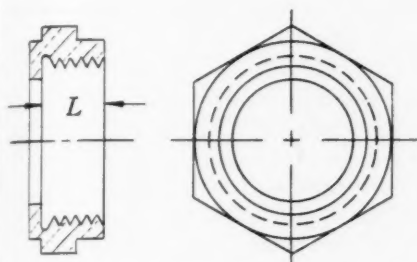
Coupling Nut for Use With Double Extra Strong Lead Flanged Pipe
